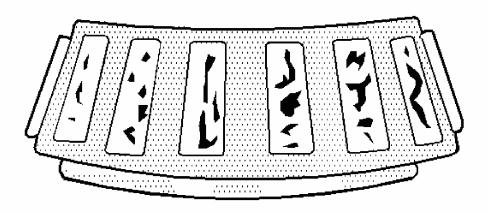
Identifying Etching Courtesy of GENERAL MOTORS CORP.
